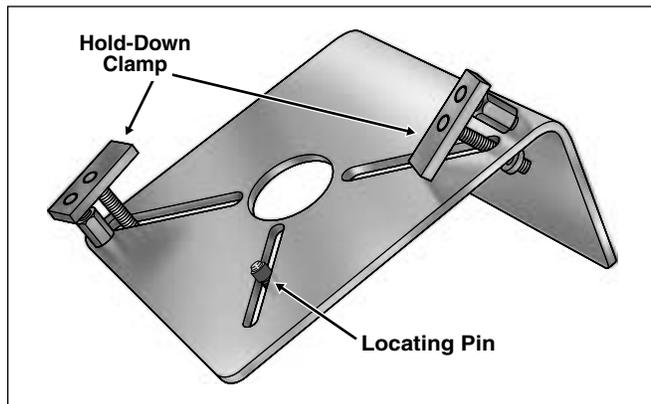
Flywheel Fixture (Part No. HD-44358)
